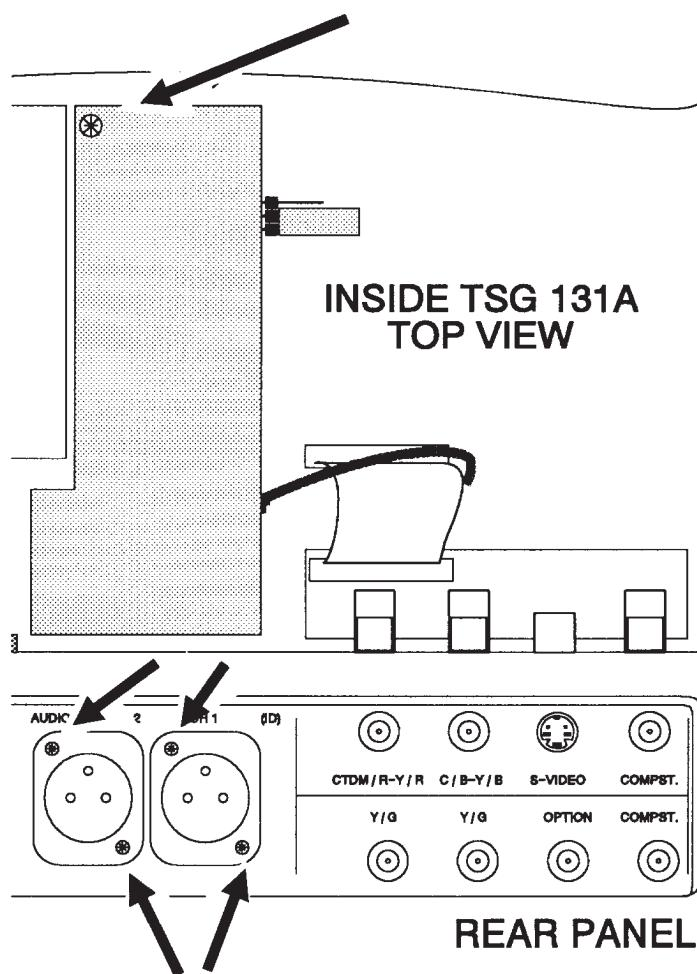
Remove these 5 screws with a Pozidrive® screwdriver in order to take out the Audio board for adjustment of the Black Burst/Comp Sync output.
